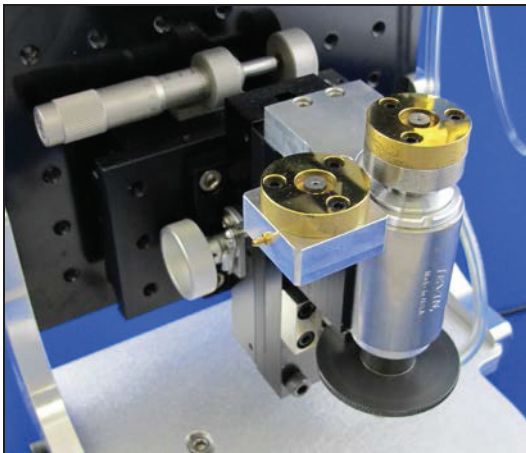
Bottom stage system. A course Z stage with a 50mm range allows for part loading on both top and bottom pucks. An X stage controlled by micrometer allows for a 2nd puck to be used in multi-component assemblies. The primary bottom puck is capable of 360 degree rotation about the Z axis.
